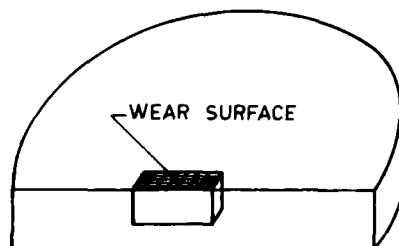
Position of the test pieces in the squeeze cast disc. Scheme
